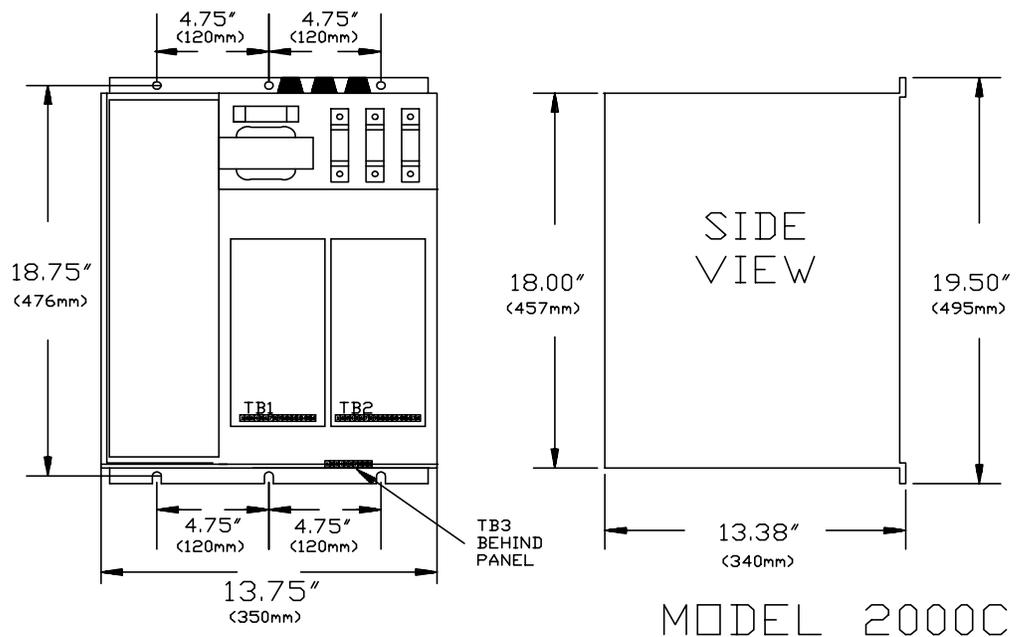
The mounting dimensions of the chassis version of Model 2000C.
